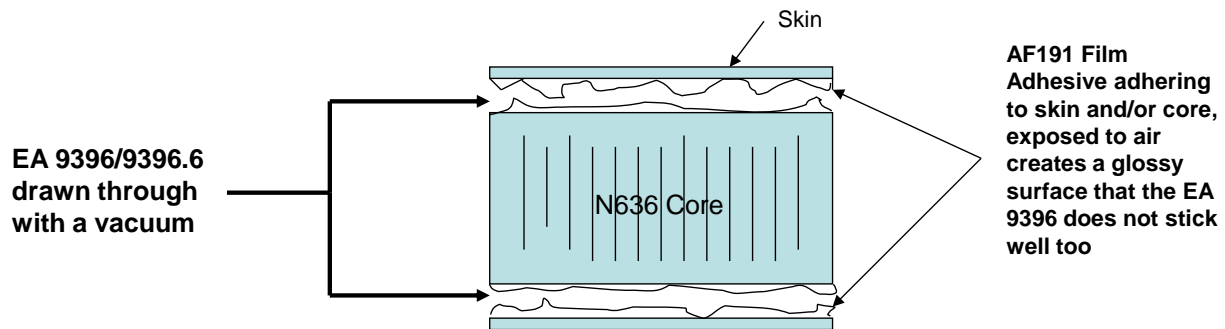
Core-to-Facesheet Disbond Resin Injection Repair.
